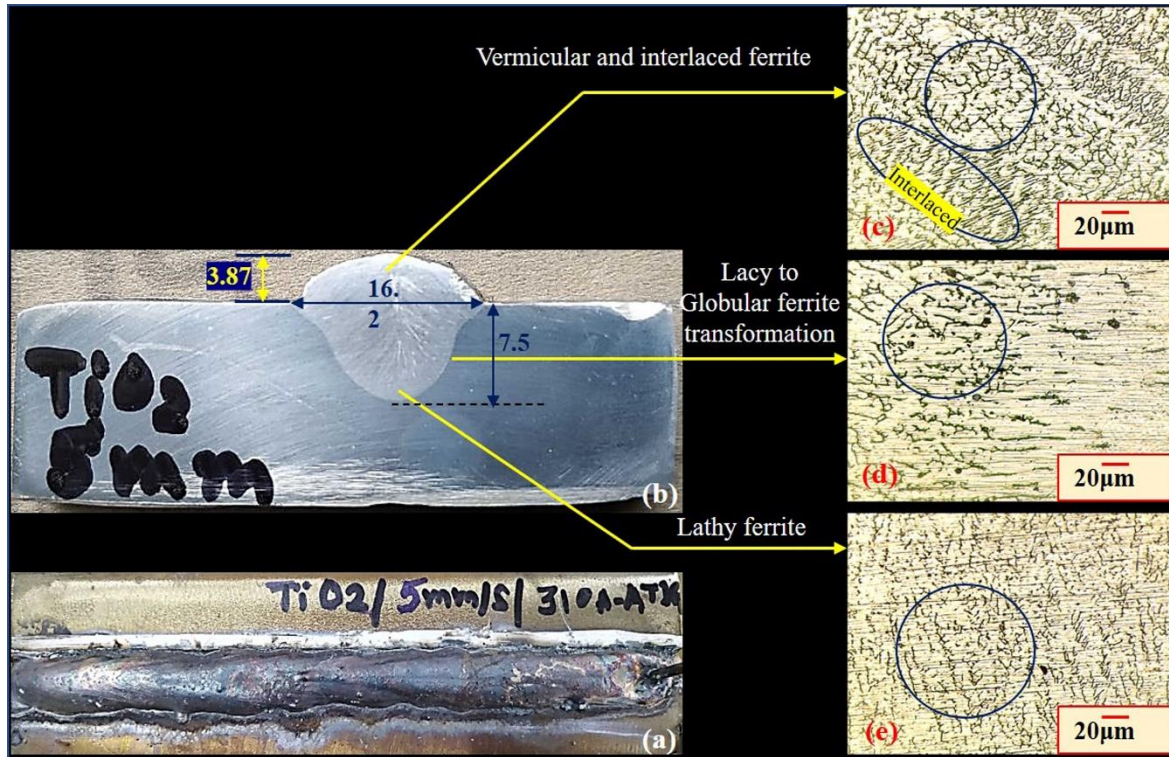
Photograph contains (a) Hybrid welded coupon using TiO₂ flux at 4 mm/s welding speed (b) Macrograph of the etched specimen (c), (d), and (e) showing the microstructure of different regions of weld bead
